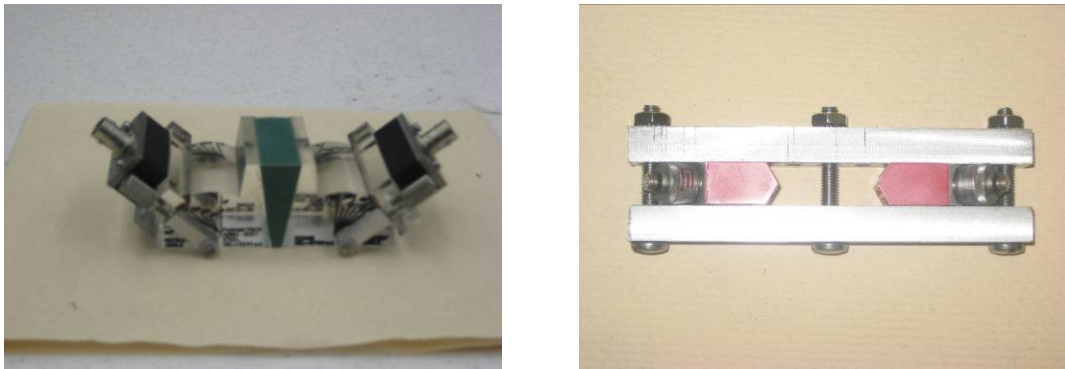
Floating pair assembly with variable angle adjustments (left) and floating pair assembly with wedges clamped together to maintain separation distance (right).
